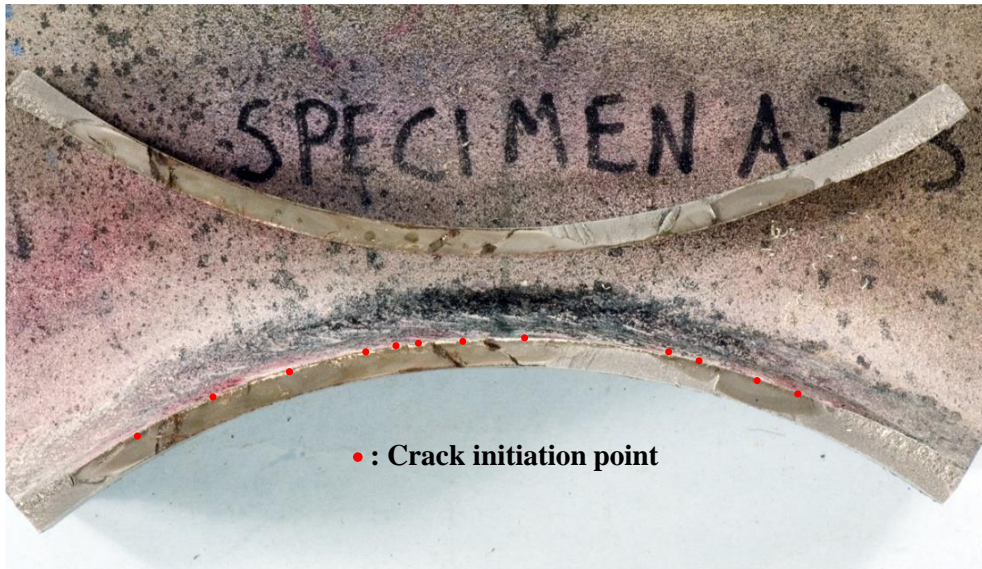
Fatigue fracture surface and identified crack initiation points in Type I-3 Arm
